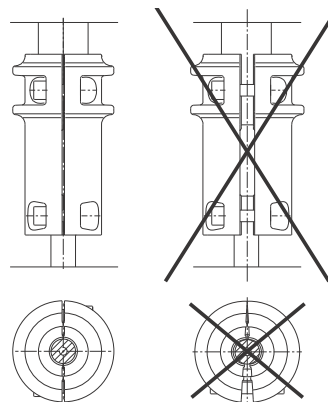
Fitting the upper shaft seal and flushing chamber
